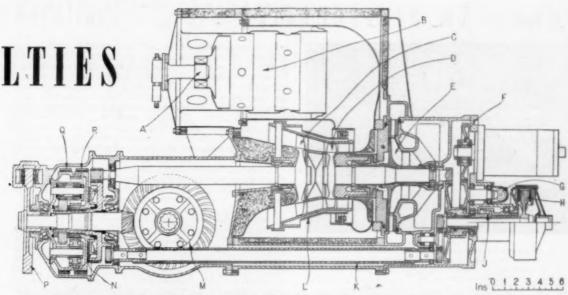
Elevation of the proposed 100 b.h.p. gas turbine. Key: A, burner; B, combustion chamber; C, power turbine; D, compressor turbine; E, compressor impeller; F, starter free-wheel; G, tachometer drive; H, friction clutch of regenerative braking system; J, free-wheel (same system); K, regenerative braking shaft; L, turbine shroud ring; M, differential cage; N, high gear clutch; P, disc brake; Q, reverse gear clutch; R, low gear clutch.
